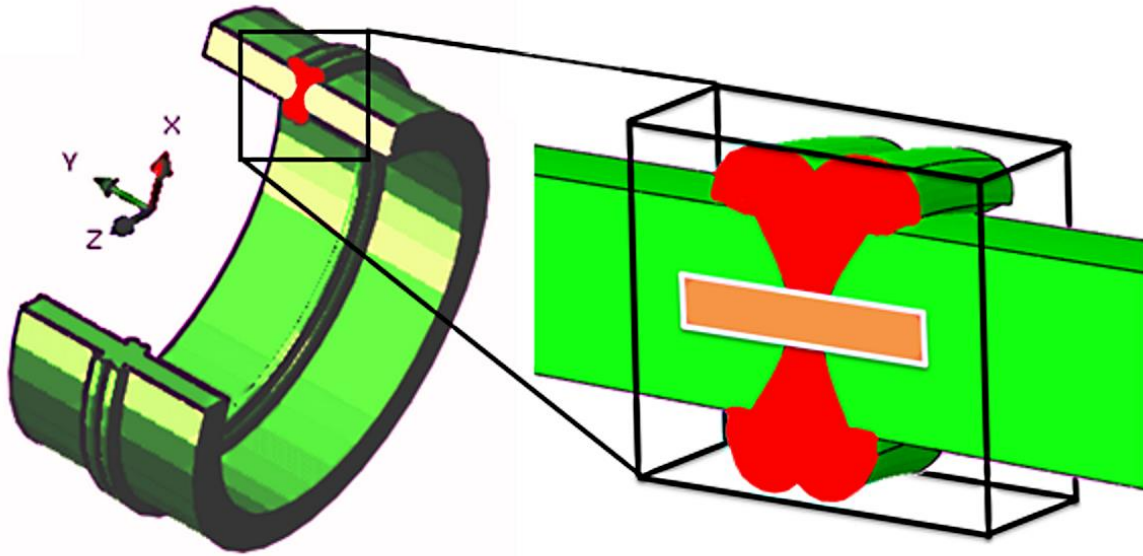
Sketch of welded HDPE pipe showing the location of the weld and the melt zone in red and the specimen for NI (enclosed in the box) where the location of the indentation grid across the weld is highlighted by the orange rectangle (Shaheer, et al., 2016)
